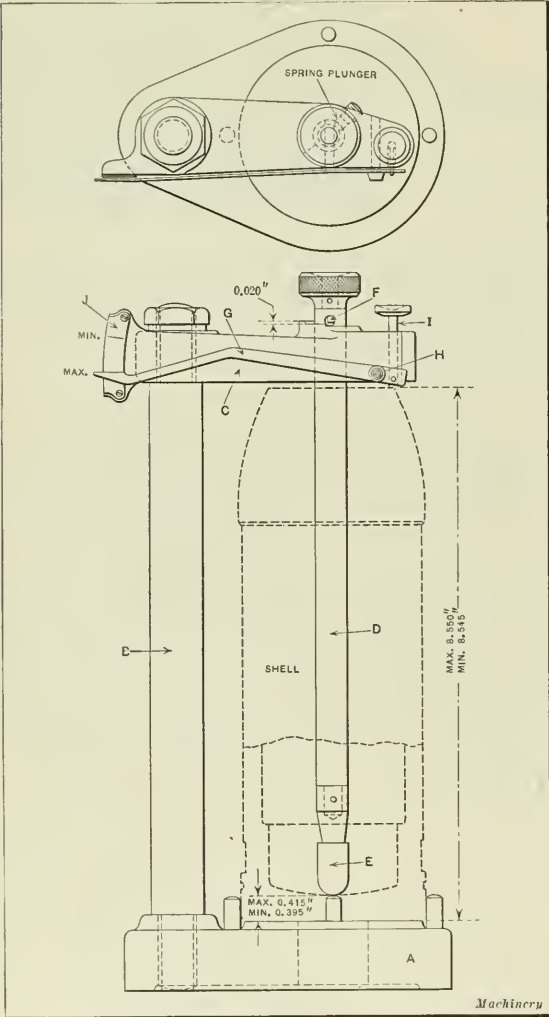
Indicating Height Gage used for inspecting Thickness of Base and Over-all Length of Shrapnel Shell
